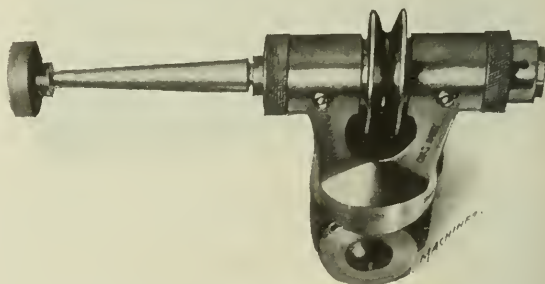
Attachment shown in Fig. 1 equipped with Internal Grinding Spindle
